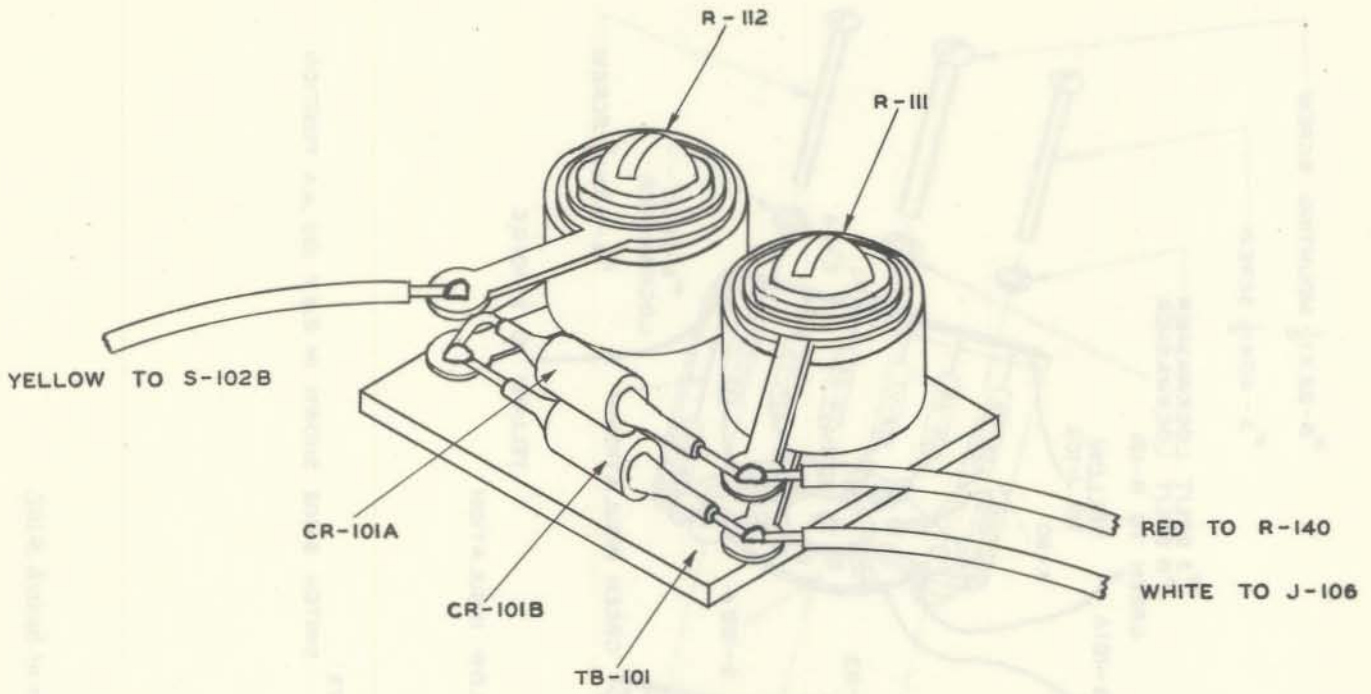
Rectifier Assembly CR-101, Outline Drawing.
